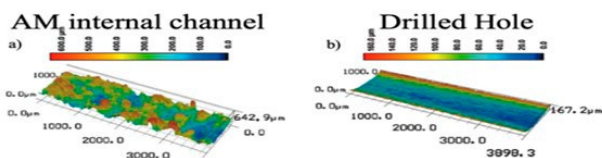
Comparison of the surface roughness of (a) AM cooling channel and (b) traditionally machined cooling channel [2]
